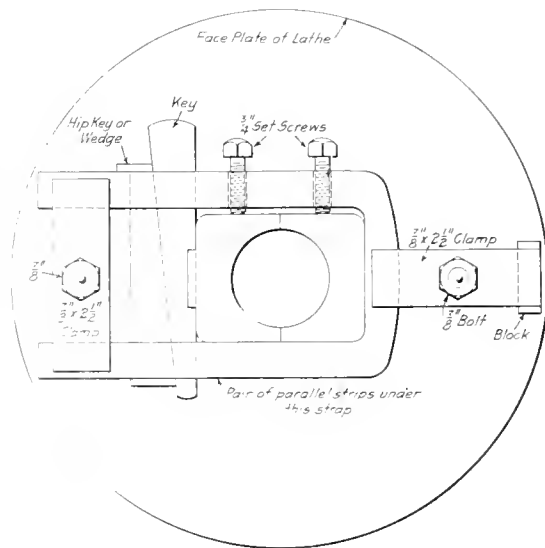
Jig for Holding the Front End Main Brass for Boring
